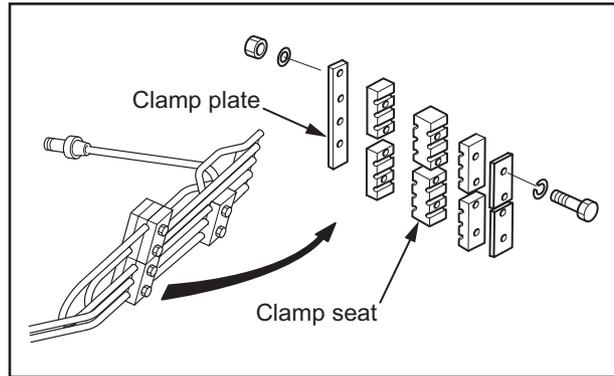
High pressure fuel injection pipe and Clamp seat - Inspect and Replace
